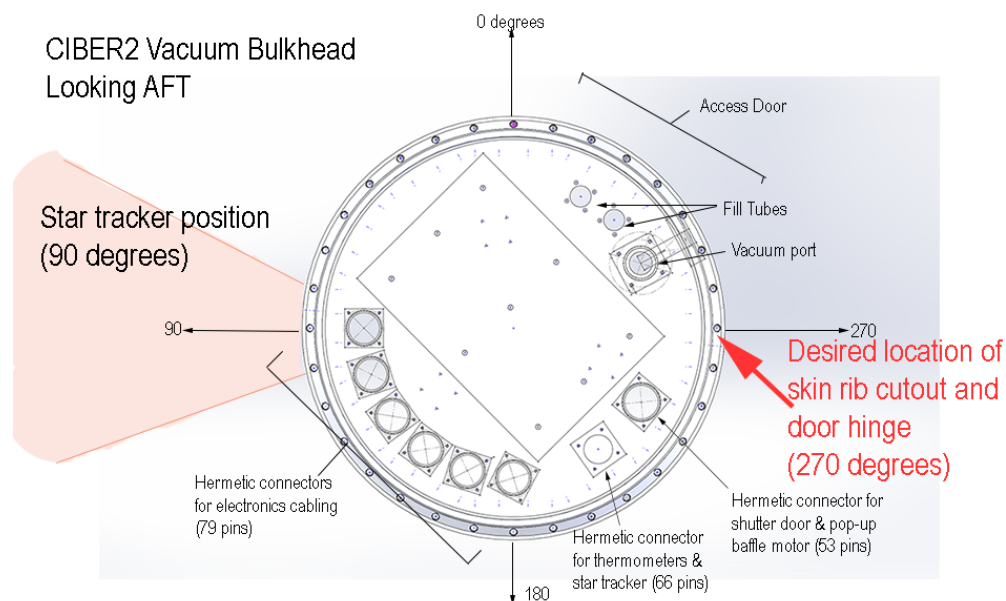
Vacuum bulkhead, looking aft down rocket skin. Warm section not shown. Hermetic connectors into evacuated section shown with labels. The rotated rectangle represents the footprint of the warm electronics box.
